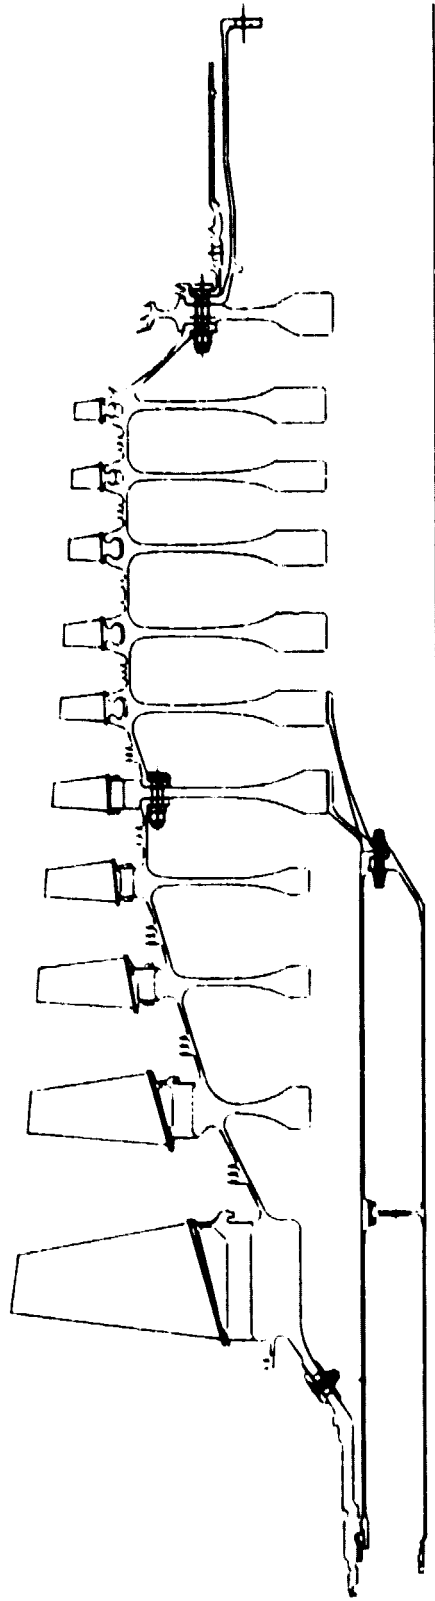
Core Rotor Assembly with Instrumentation Lead Out Duct.
